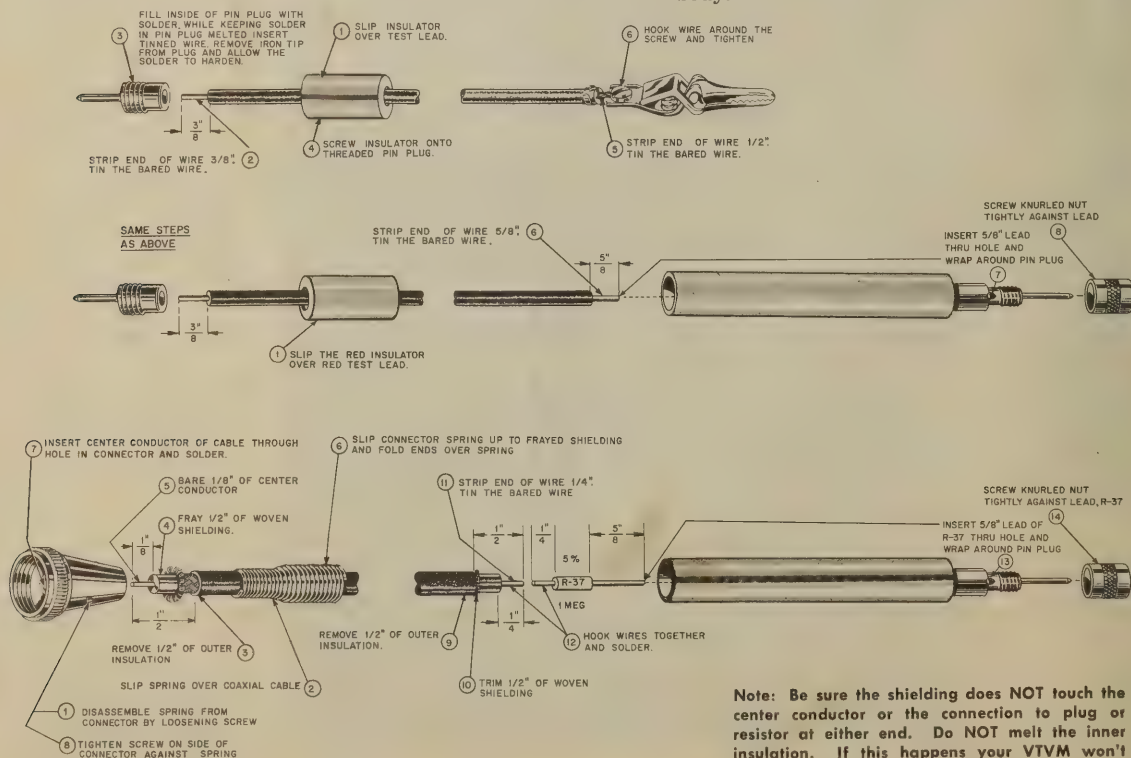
HOW TO ASSEMBLE THE TEST LEADS
